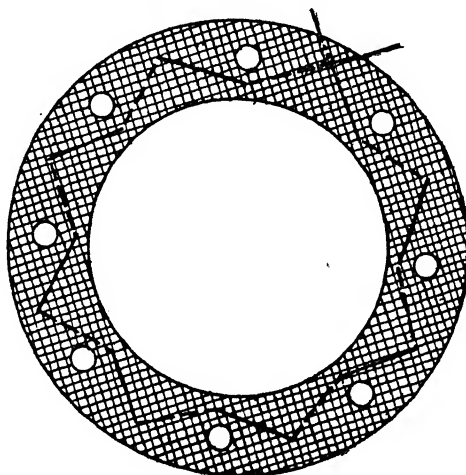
Copper Gauze Joint Ring with Lead Wire woven in and filled with Red-lead Putty
